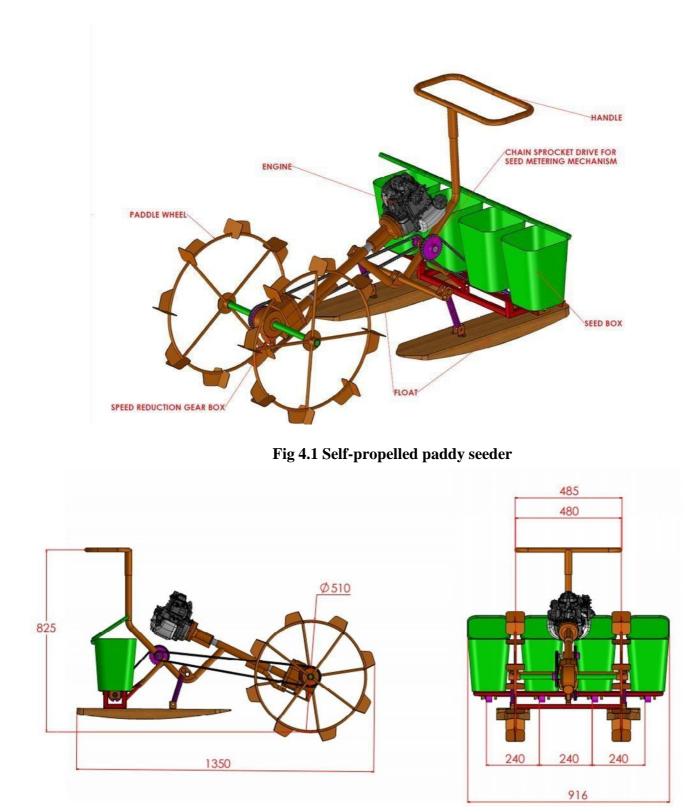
Dimensional drawing of self-propelled paddy seeder (all measurements are in mm)
